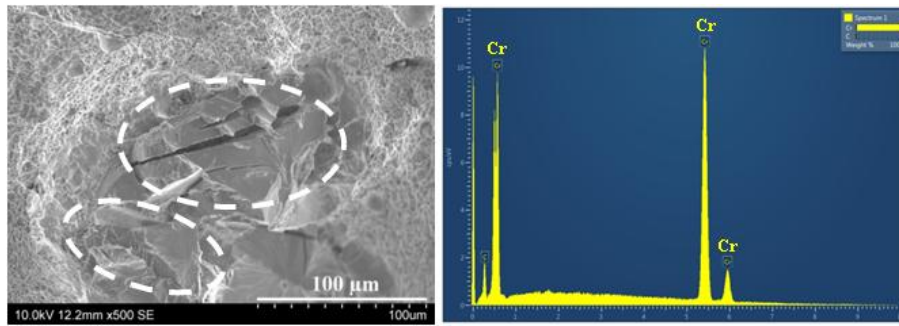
Traces of non-melted chromium on CVN fracture surface of the heat-treated weld metal
